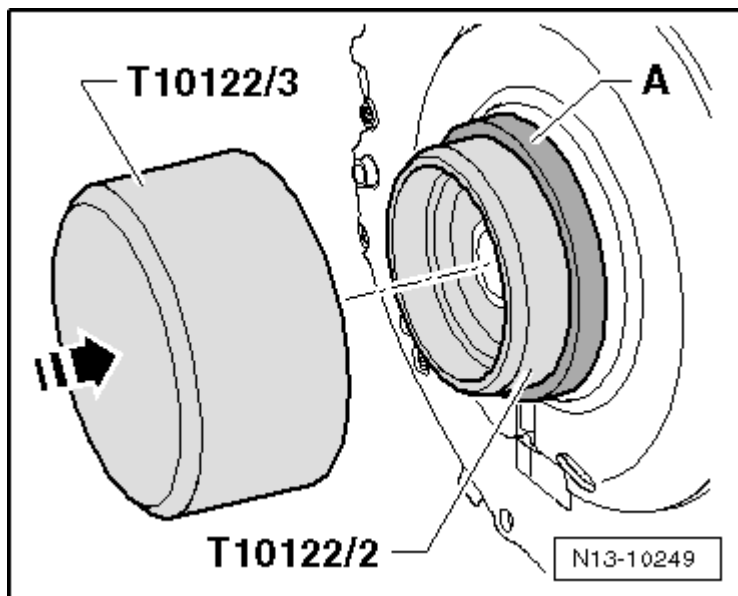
Installing Pull Sleeve T10122/2 With Sealing Ring Onto Crankshaft
